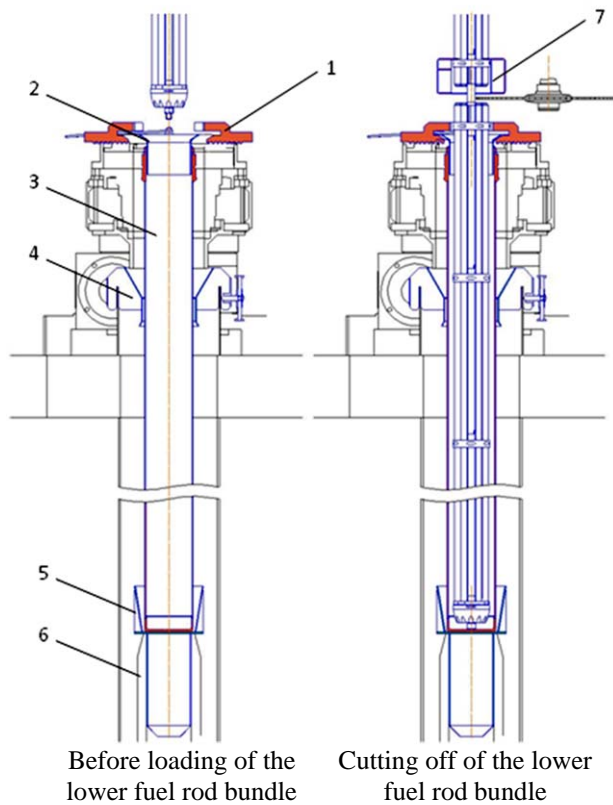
Location of the equipment for containment of the fuel spillage in the SFA disassembling unit: 1 – jaw; 2 – funnel; 3 – ampoule; 4 – upper centralizer; 5 – lower centralizer; 6 – tilter canister; 7 – can
